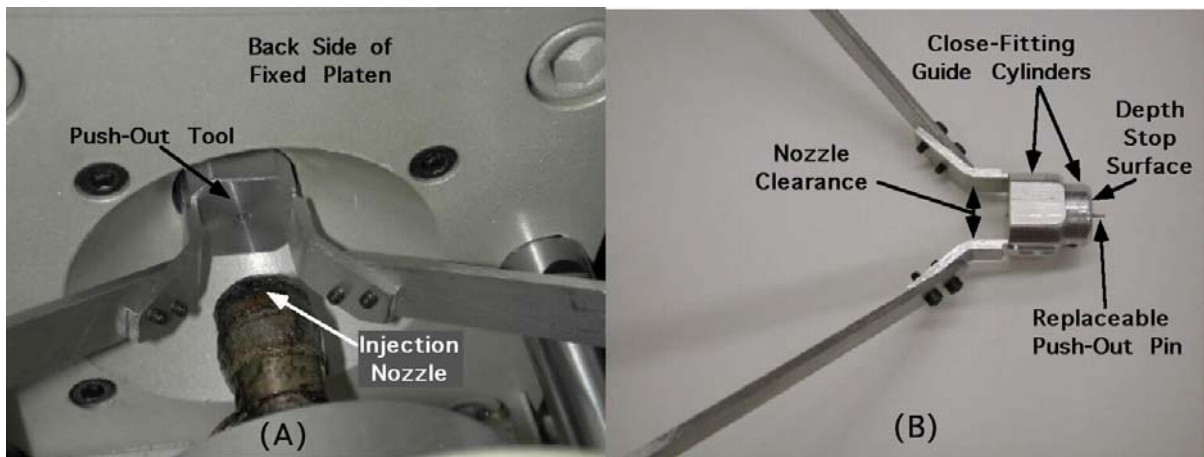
Push-Out Tool Used to Release the Solidified Polymer Sprue from the Mold Shown (A) in Use and (B) in a Top View
